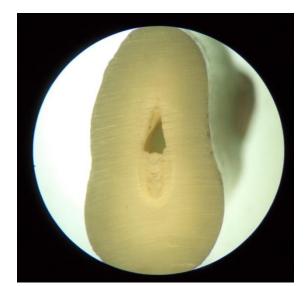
MOUNTED SPECIMENS AFTER SECTIONING
